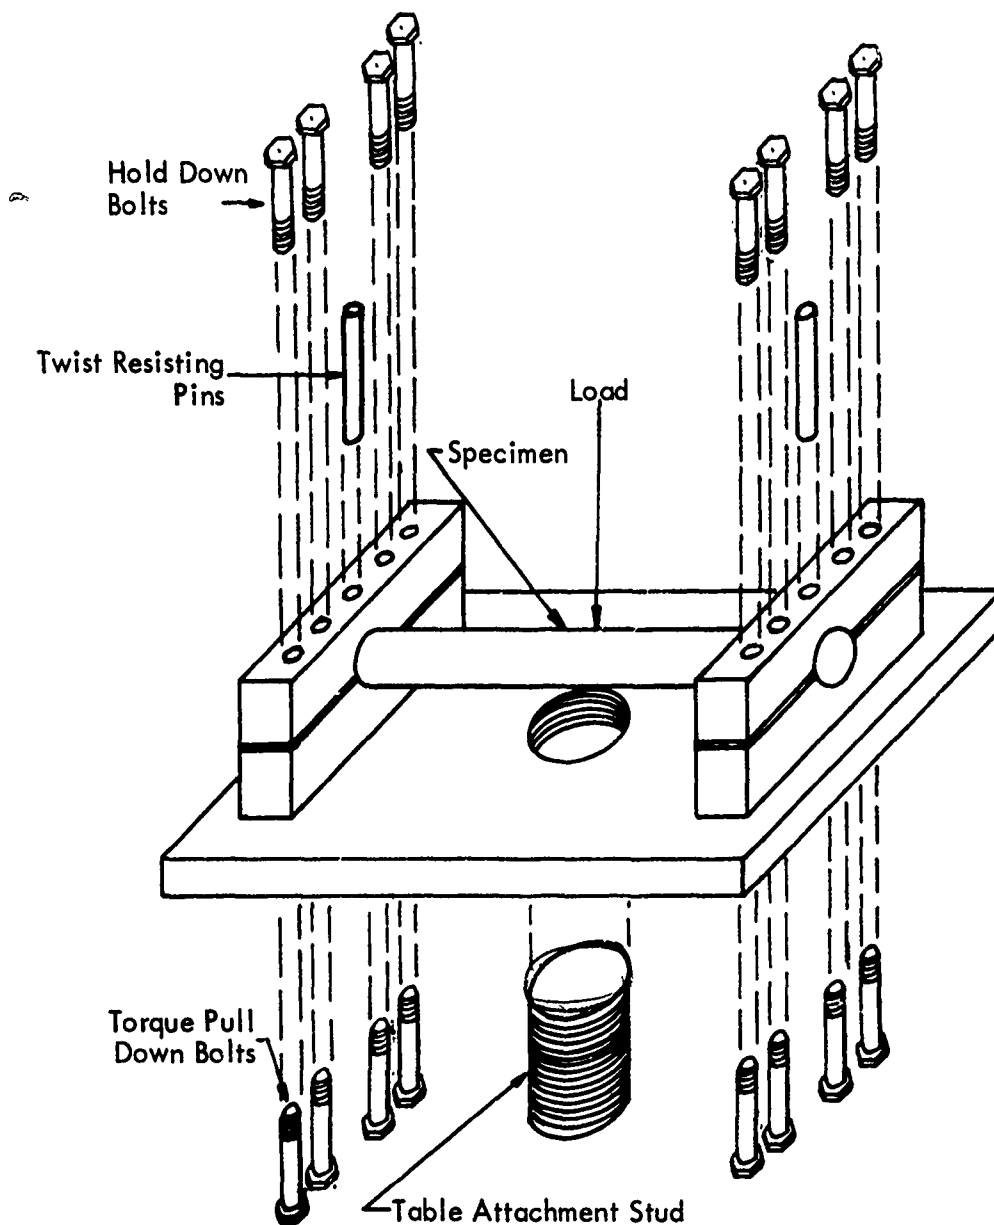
SCHEMATIC SKETCH OF LOADING FIXTURE FOR FATIGUE CRACKING OF TEST CYLINDERS
